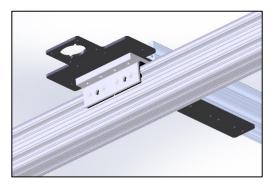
SolidWorks assembly model of mounted primary gantry motion system [1]. The system uses a nylon bearing and NEMA 23 motor mount to horizontally attach to 20' length of 25-5050 80/20 aluminum extrusion [2].
